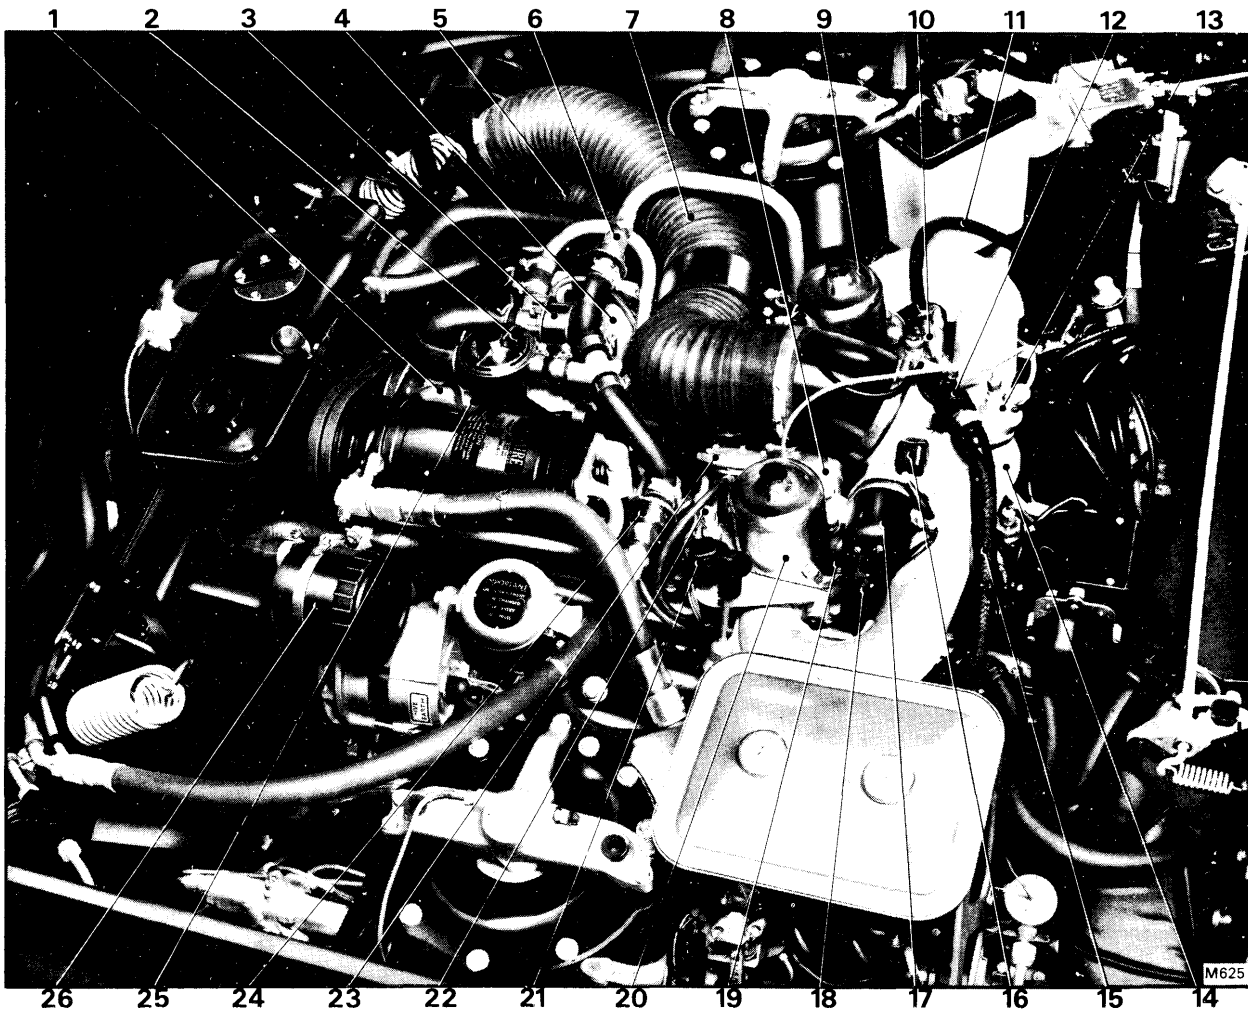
VIEW INSIDE ENGINE COMPARTMENT (Early Cars)
